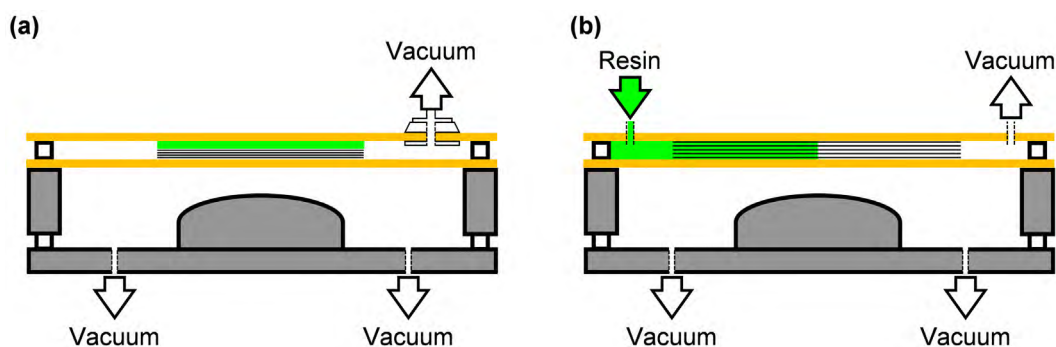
Hybrid VI-forming techniques: (a) FRTM and (b) RIDFT.
